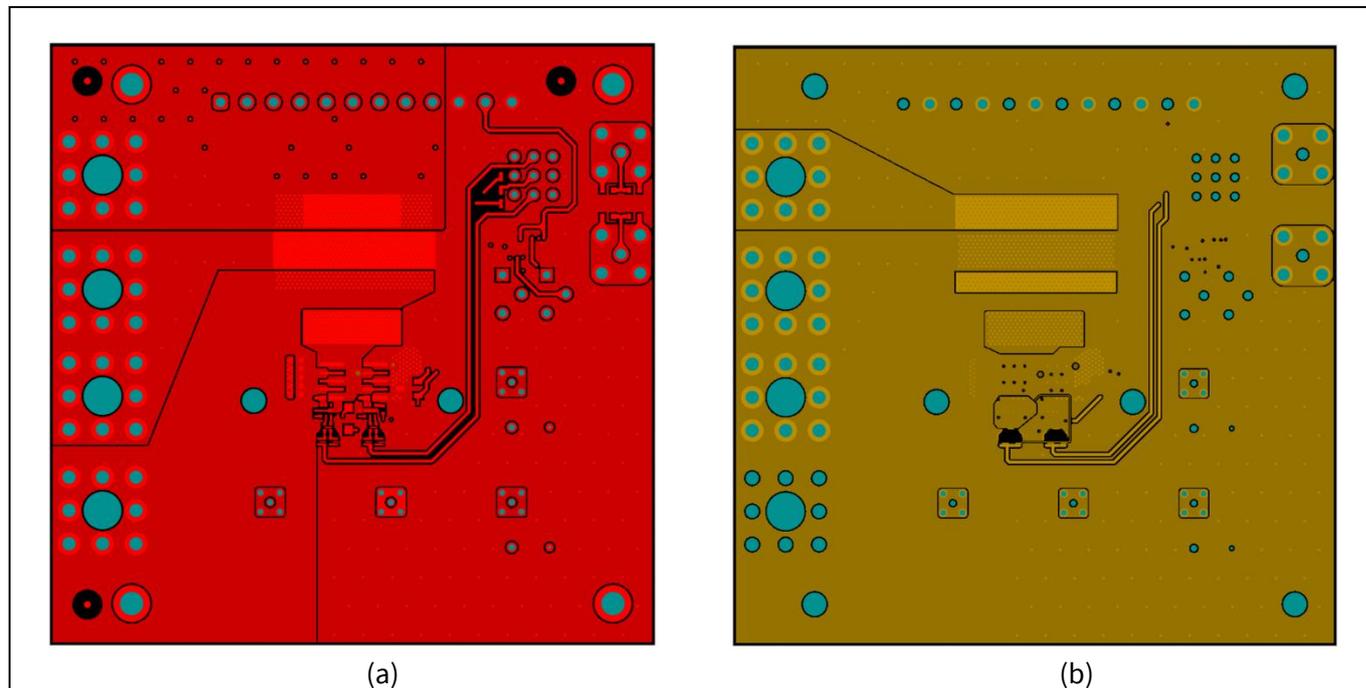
(a) PCB layout top-layer and (b) mid-layer 1
